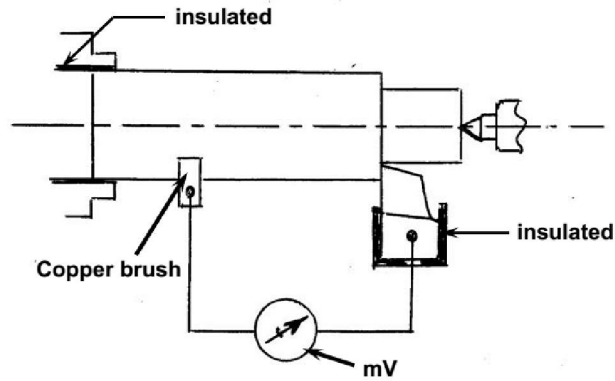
Tool-work thermocouple technique of measuring cutting temperature
